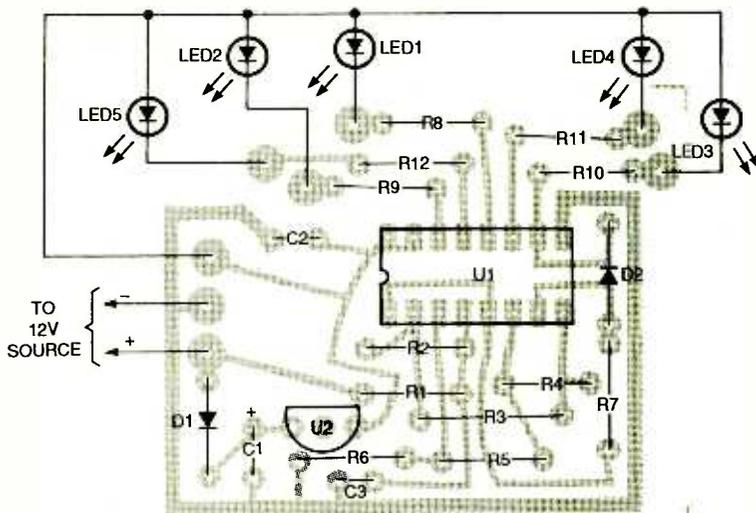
Assemble your printed-circuit board according to this parts-placement diagram. It is strongly recommended that a socket be provided for U1.
